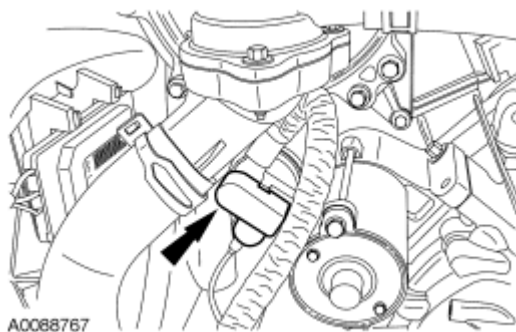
Identifying Electrical Cover For Starter Motor Electrical Connectors
